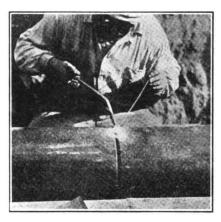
JOINING TWO 20-FOOT PIPE SECTIONS EACH 10-INCHES IN DIA-METER AND 3%-INCH THICK
